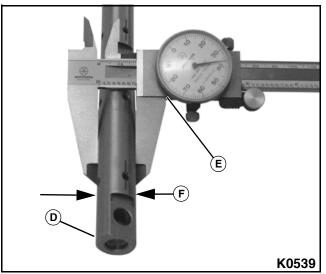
Measuring the Rocker Arm Shaft Outside Diameter
